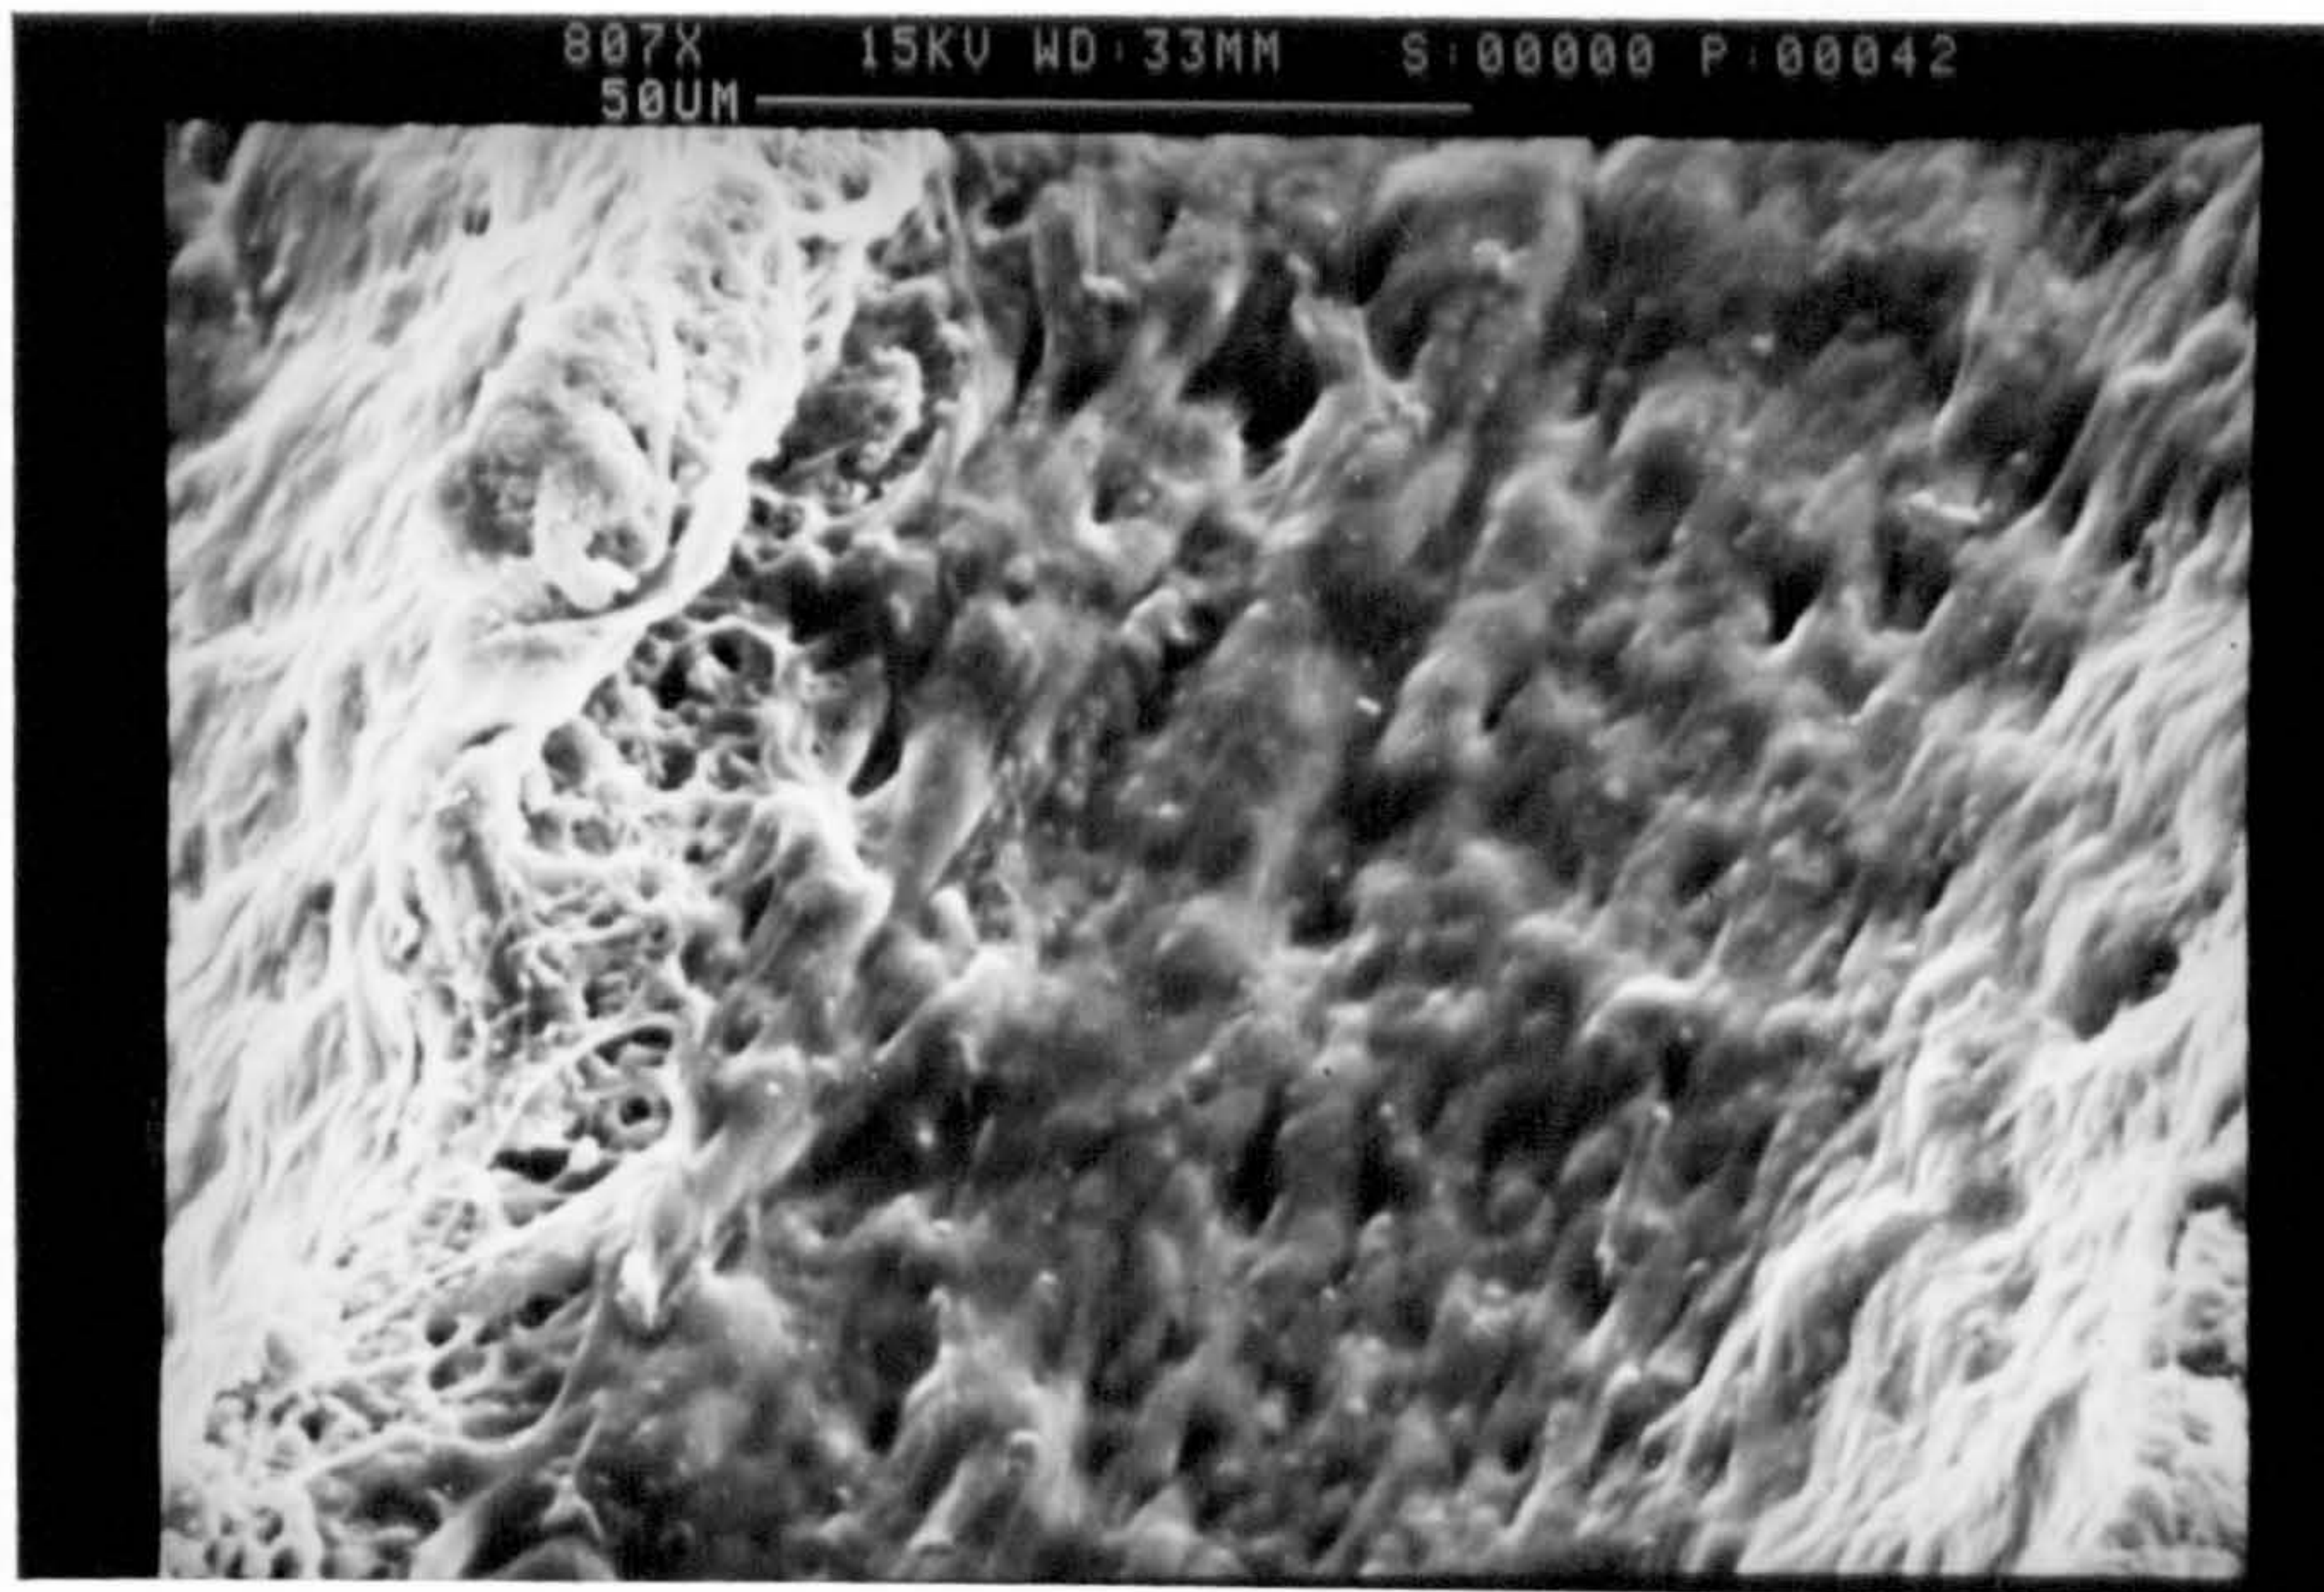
Magnified view of PVC machined surface in continuous chip formation. (Rake angle =  $10^{\circ}$ , speed = 150 m/min, feed = 0.14 mm/rev)
